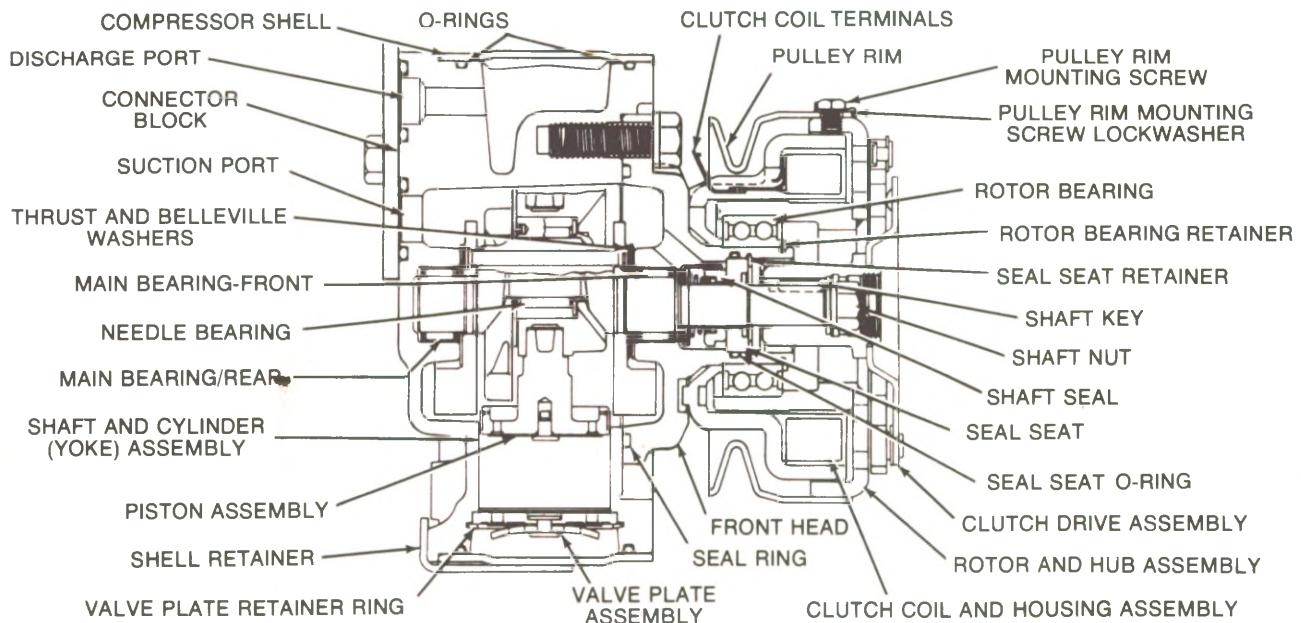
GM 4 Cylinder Compressor — Internal
